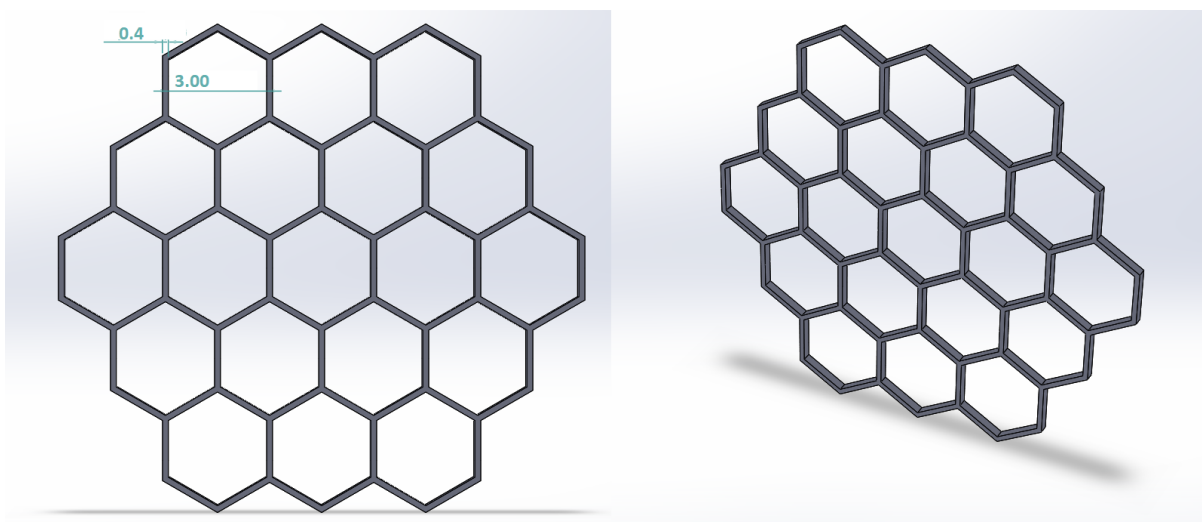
CAD model: 2D- view (left) and 3D-view (right)
